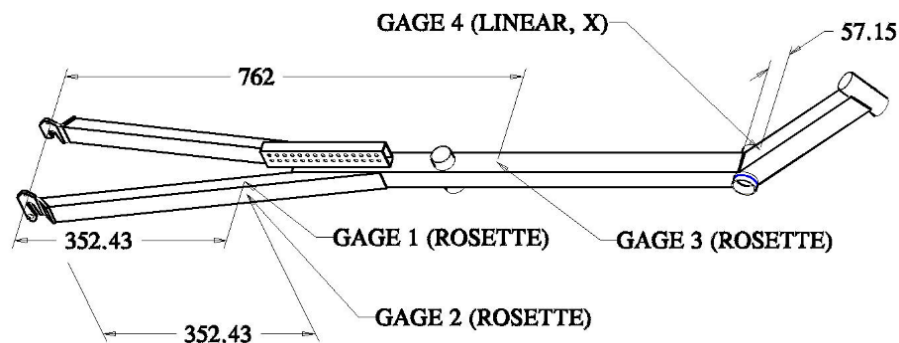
Frame Diagram with Gauge Positions – Dimensions are in millimeters (mm)
